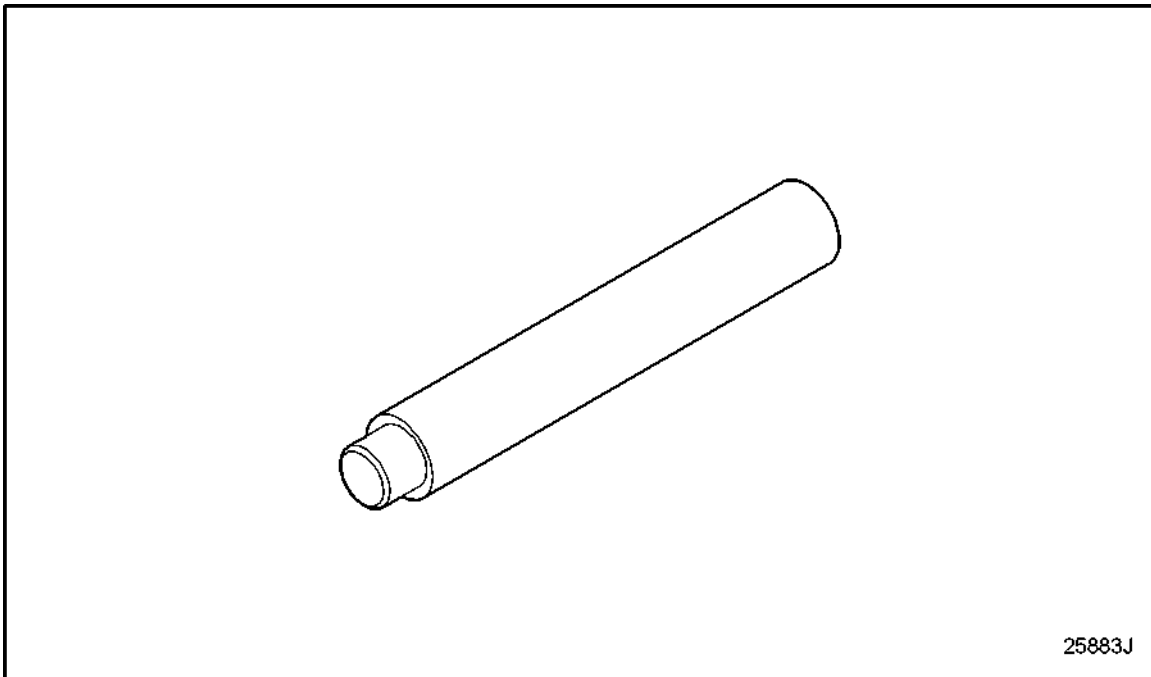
Gov Weight Shaft Ret Ring Installer,J 21967-01
